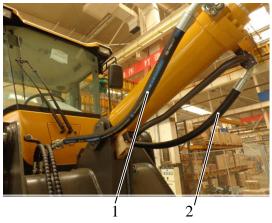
1 Bucket cylinder rod-side rubber hose 2 Bucket cylinder piston-side rubber hose
